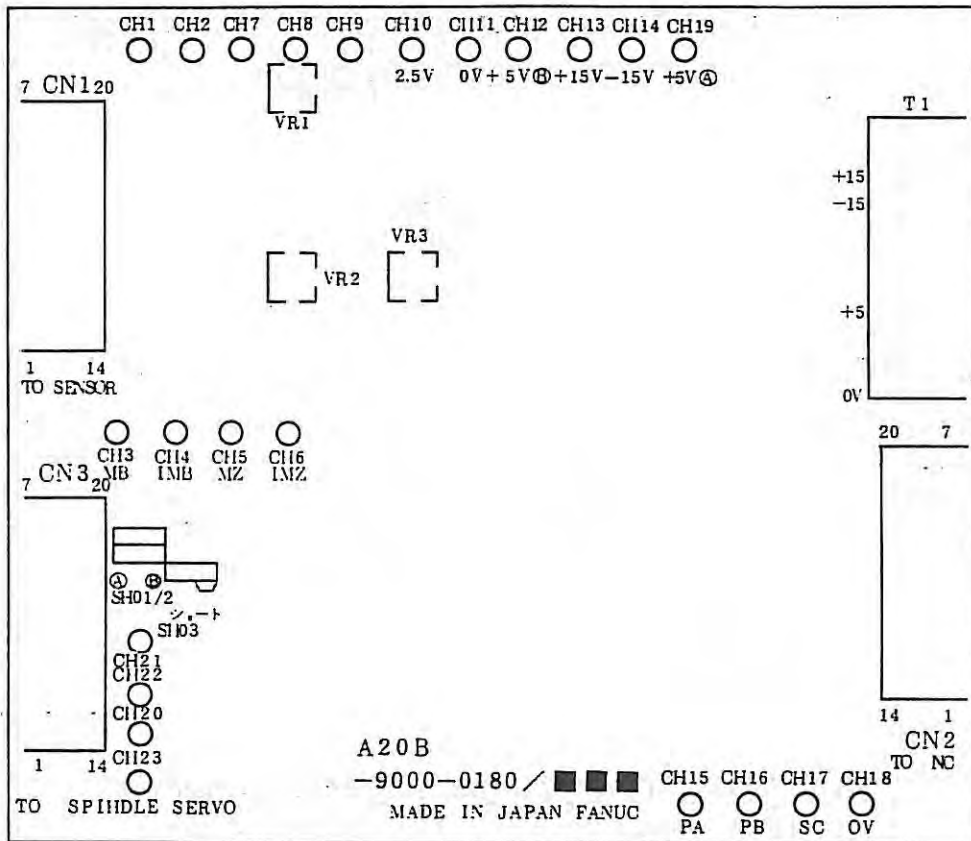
(a) Mounting positions for jumper, variable resistors and test points printed circuit board drawing No.: A20B-9000-0180
